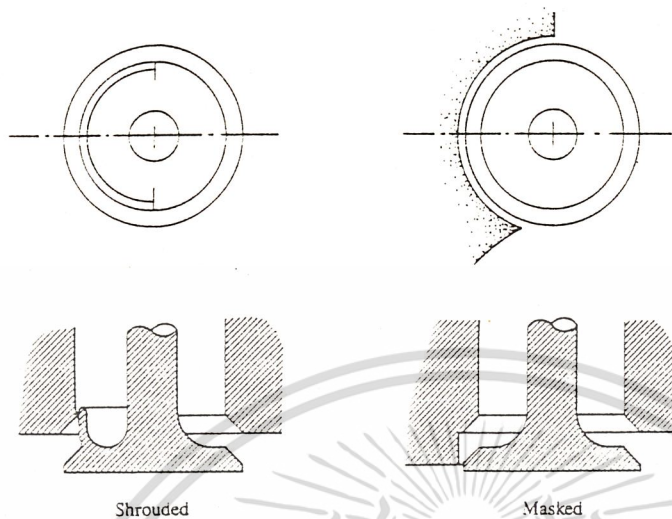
Shrouded inlet valve and masked cylinder head approaches for producing net in-cylinder angular momentum.
